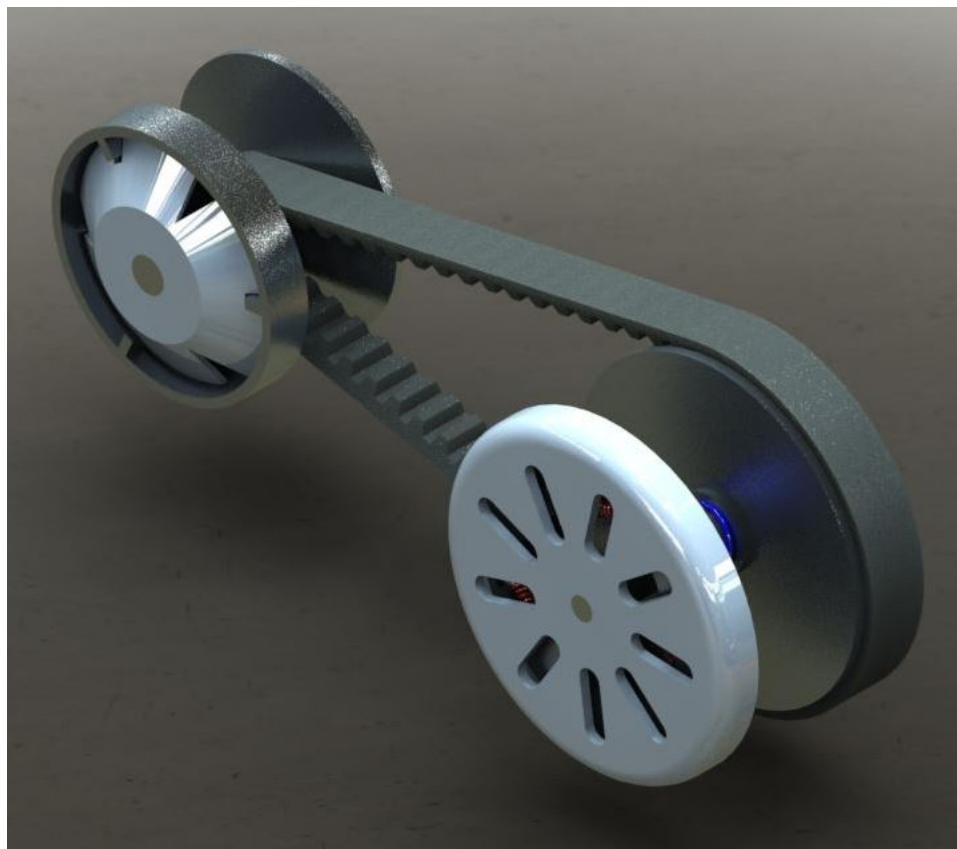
Concept 2 full Assembly – Variator (top left) and clutch (bottom right)
